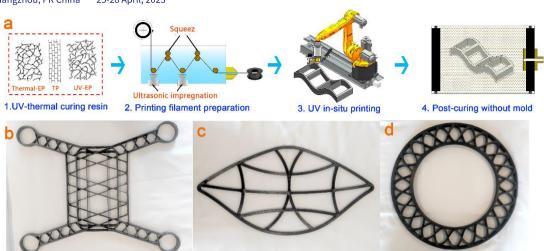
a) illustrations of UV-thermal curing 3D printing process, (b) printed quadrotor UAV frame, (c) web frame, (d) circular frame
